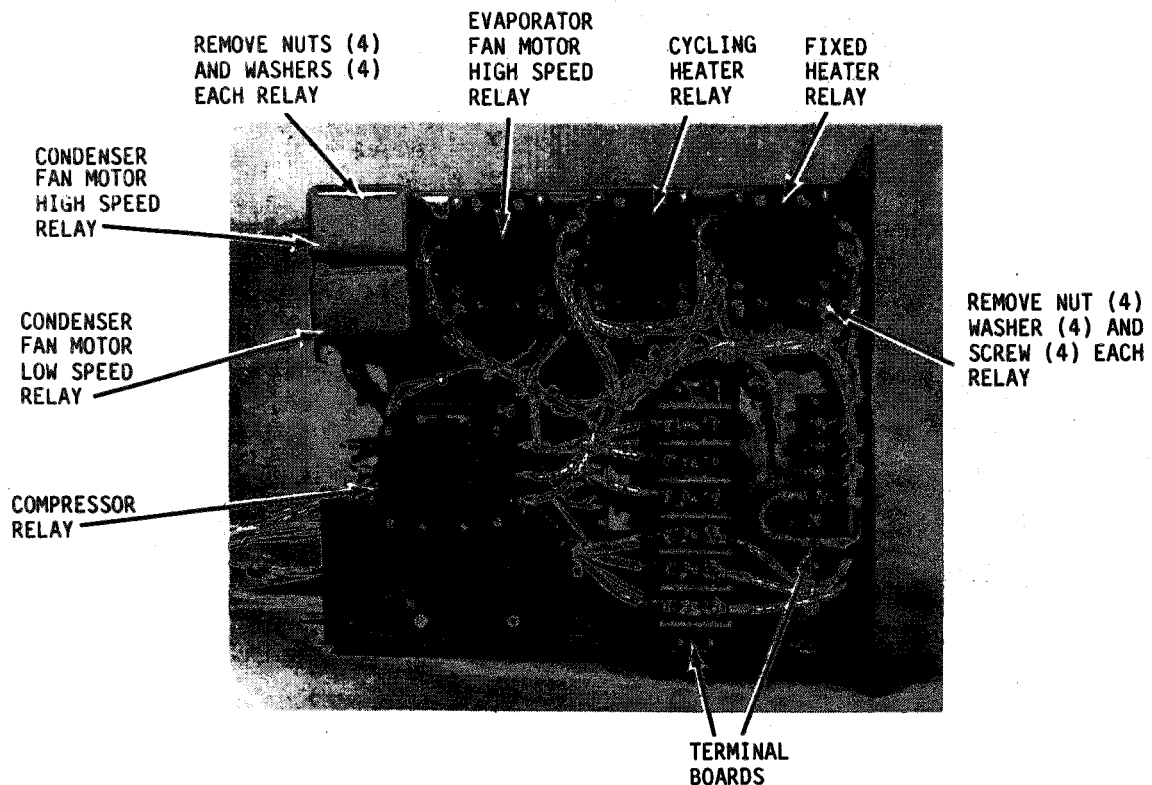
Heater relays, evaporator fan motor high speed relay, condenser fan motor relays, compressor relay and terminal boards, removal and installation.
